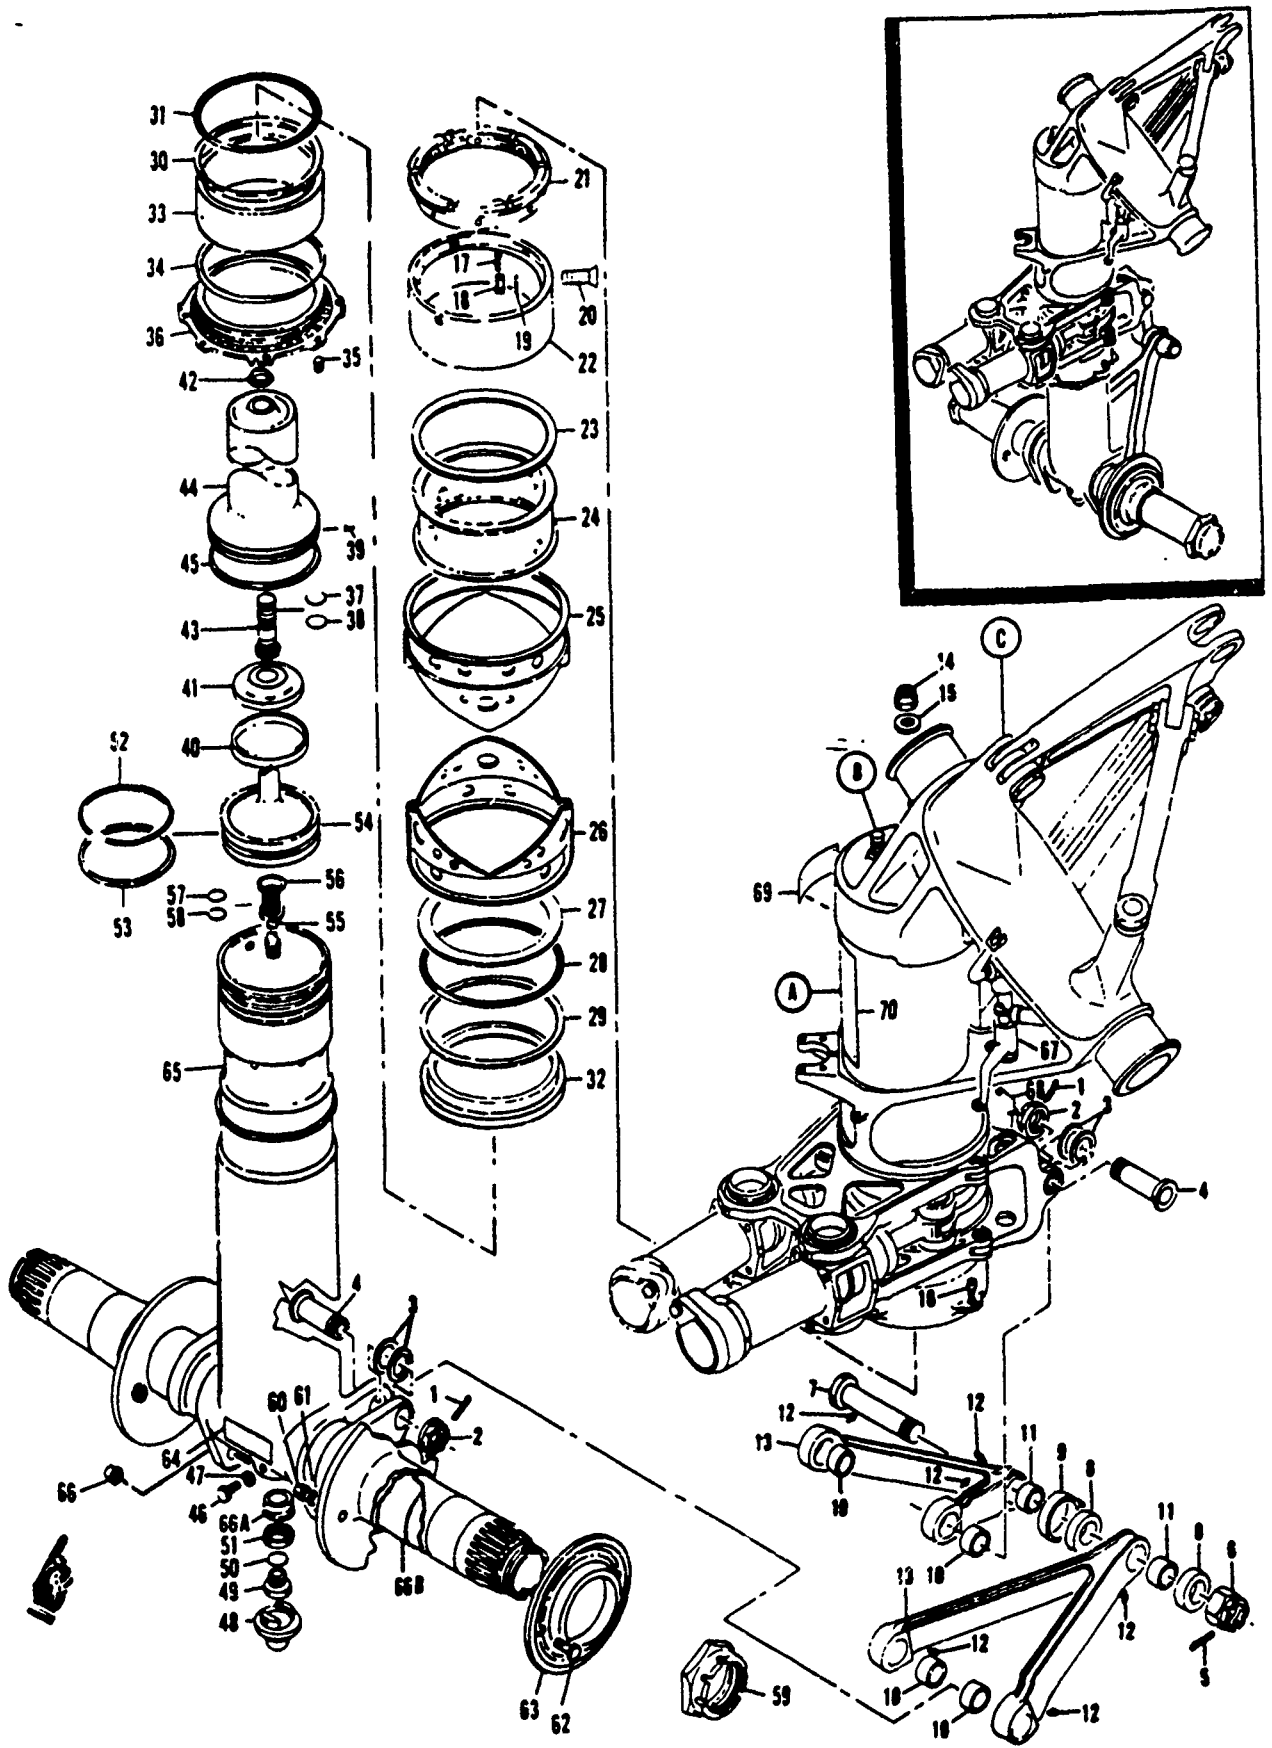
Main Landing Gear Strut Assembly (Sheet 2 of 4)
